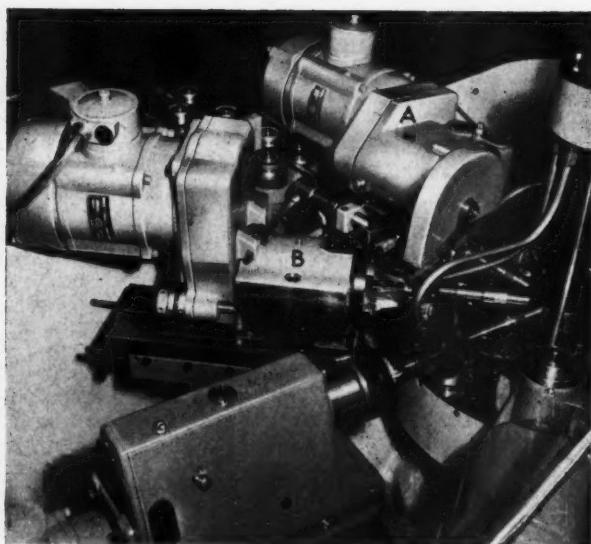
The recently-introduced turning head for the Variomatic machine is shown at *B* in this close-up view
